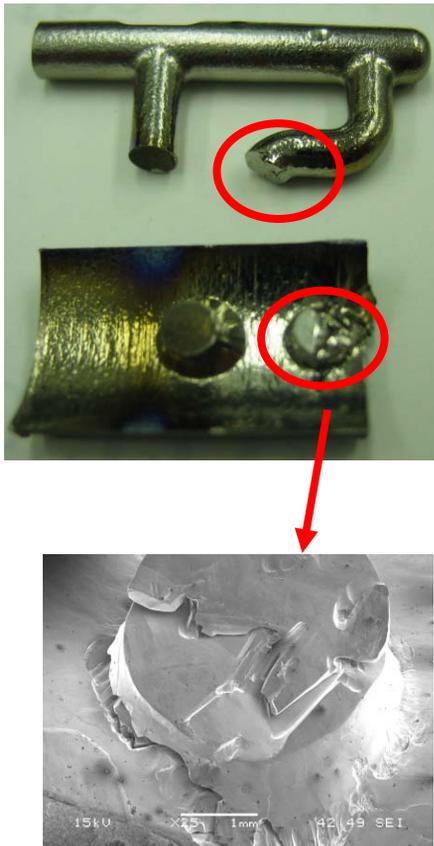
Fractured F-piece removed from Cavity 2 and SEM image of same. The break occurred on the right leg.
